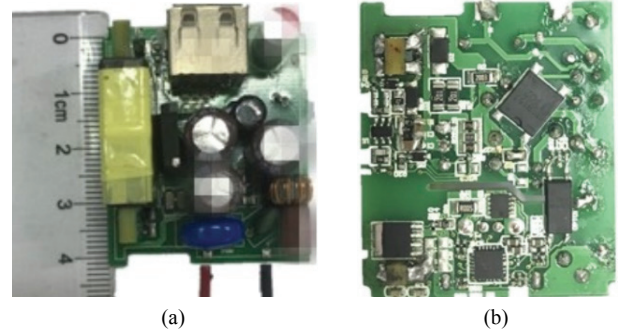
Flyback adapter with the proposed balance winding: (a) Top view of the prototype; (b) Bottom view of the prototype.
